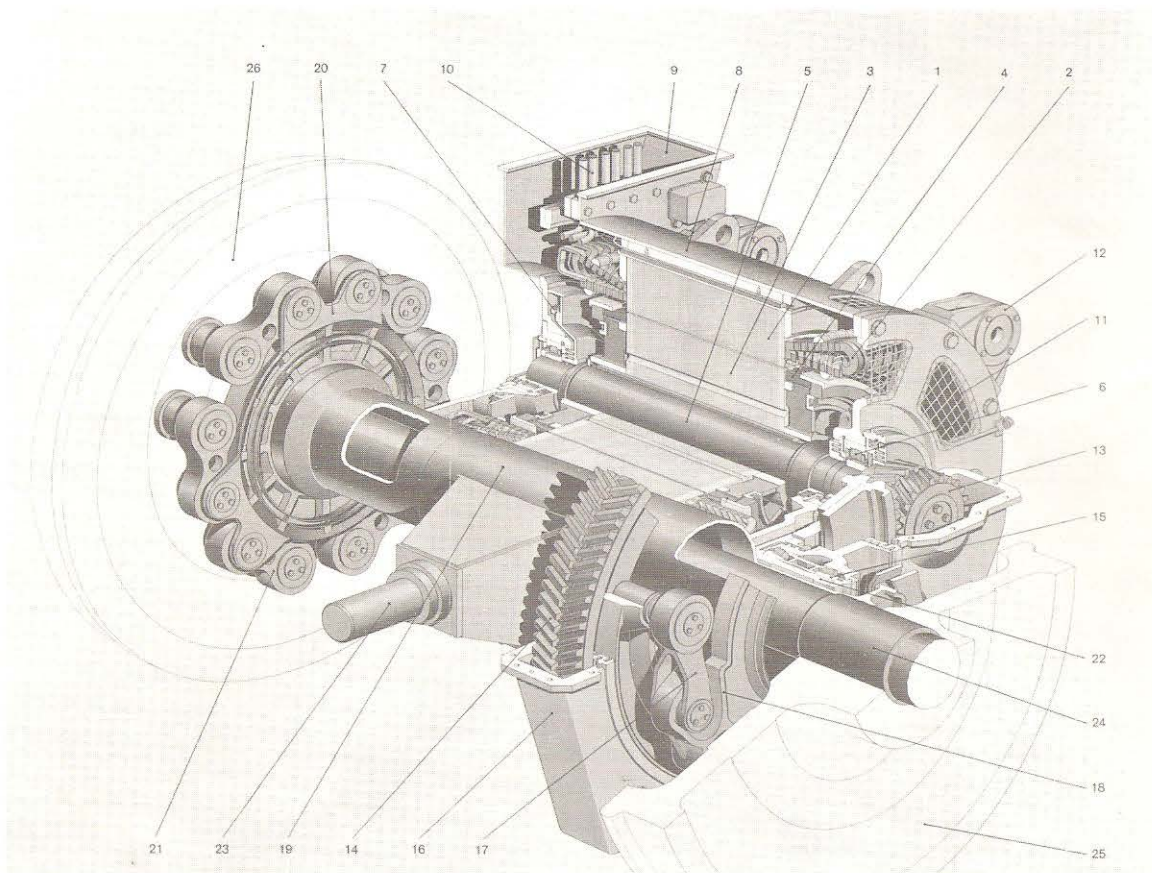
General arrangement of final drive, frame-suspended squirrel-cage motor and hollow cardan-shaft transmission group
